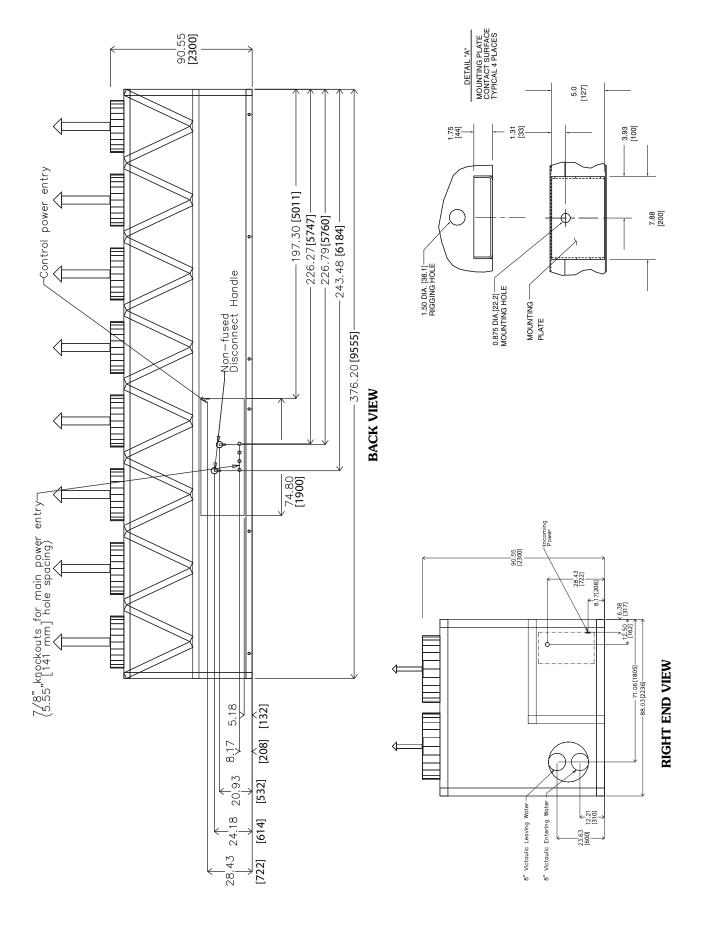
30XA260-300 Air-Cooled Liquid Chiller Dimensions (cont)
